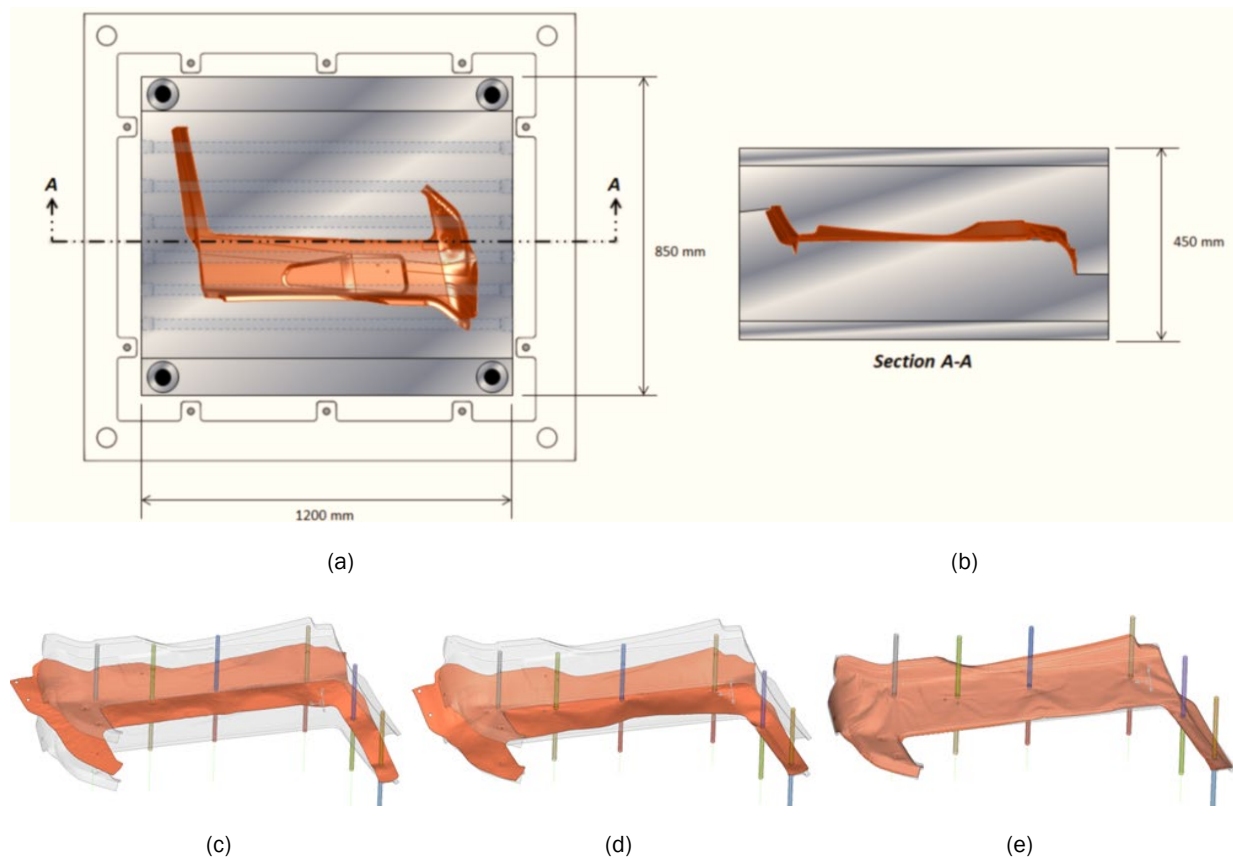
(a) Initial tool concept of the inner beltline stiffener. (b) Thermoforming simulation of the inner beltline stiffener. (c) Before forming. (d) Cavity driver touch lower tool. (e) Tool closed condition.
